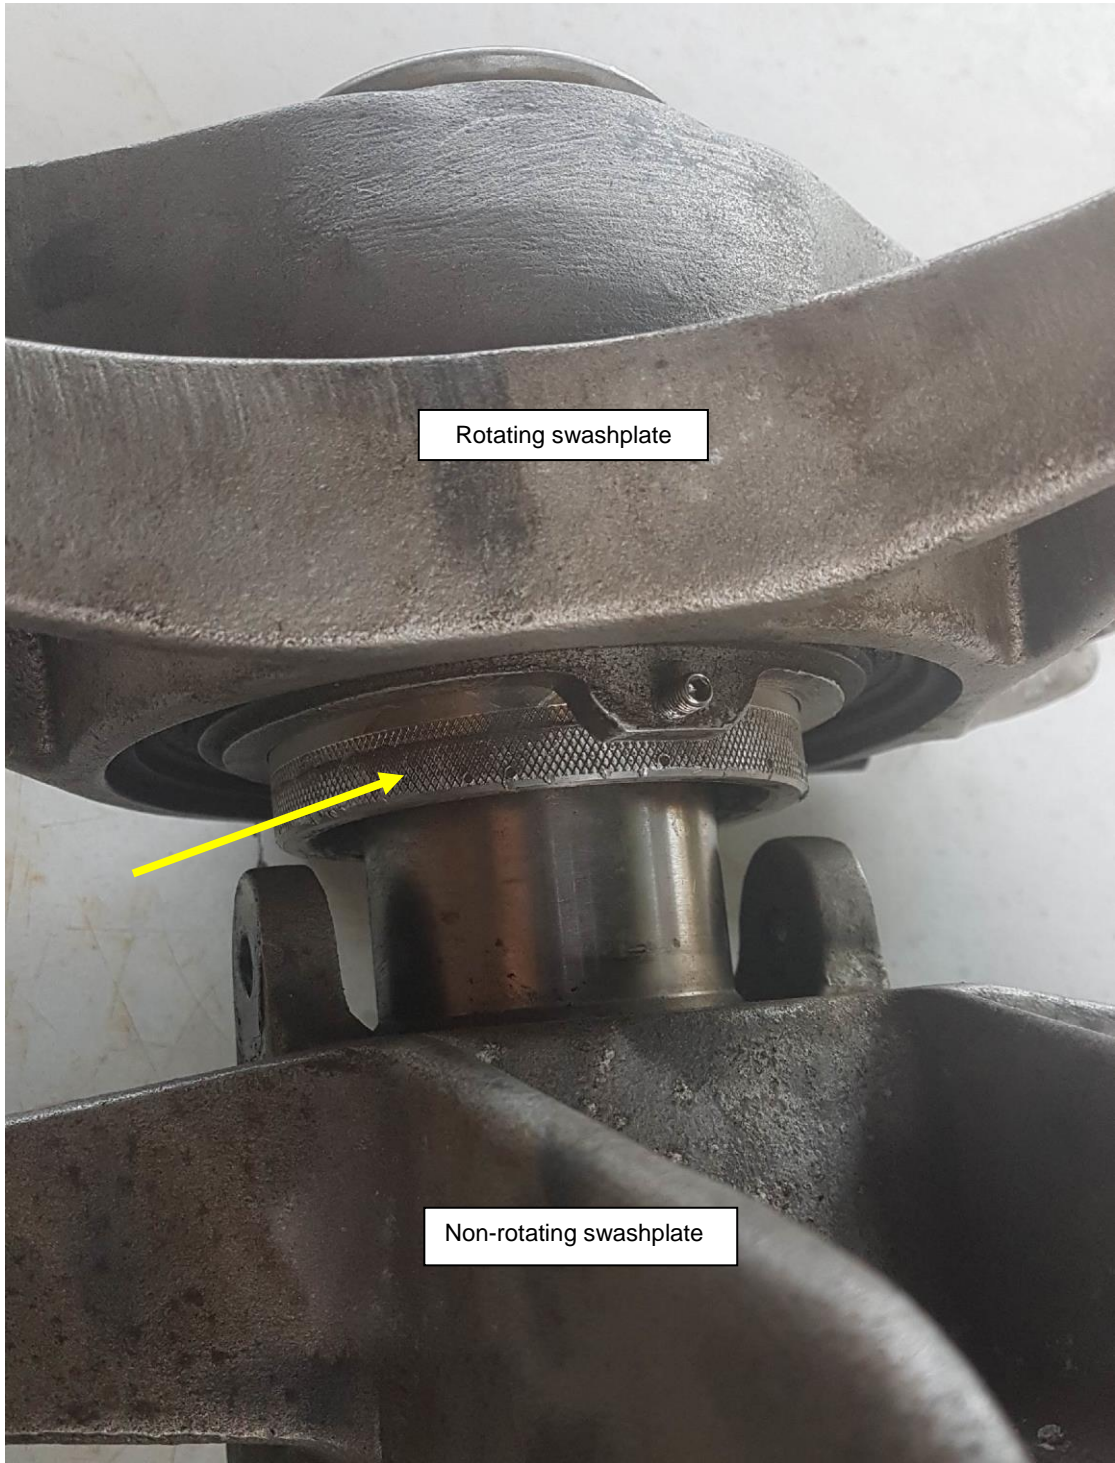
The swashplate assembly with the slider ball adjustment collar prior to disassembly.
